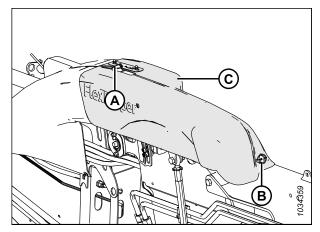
Inboard Flex Linkage Cover - Left Side
